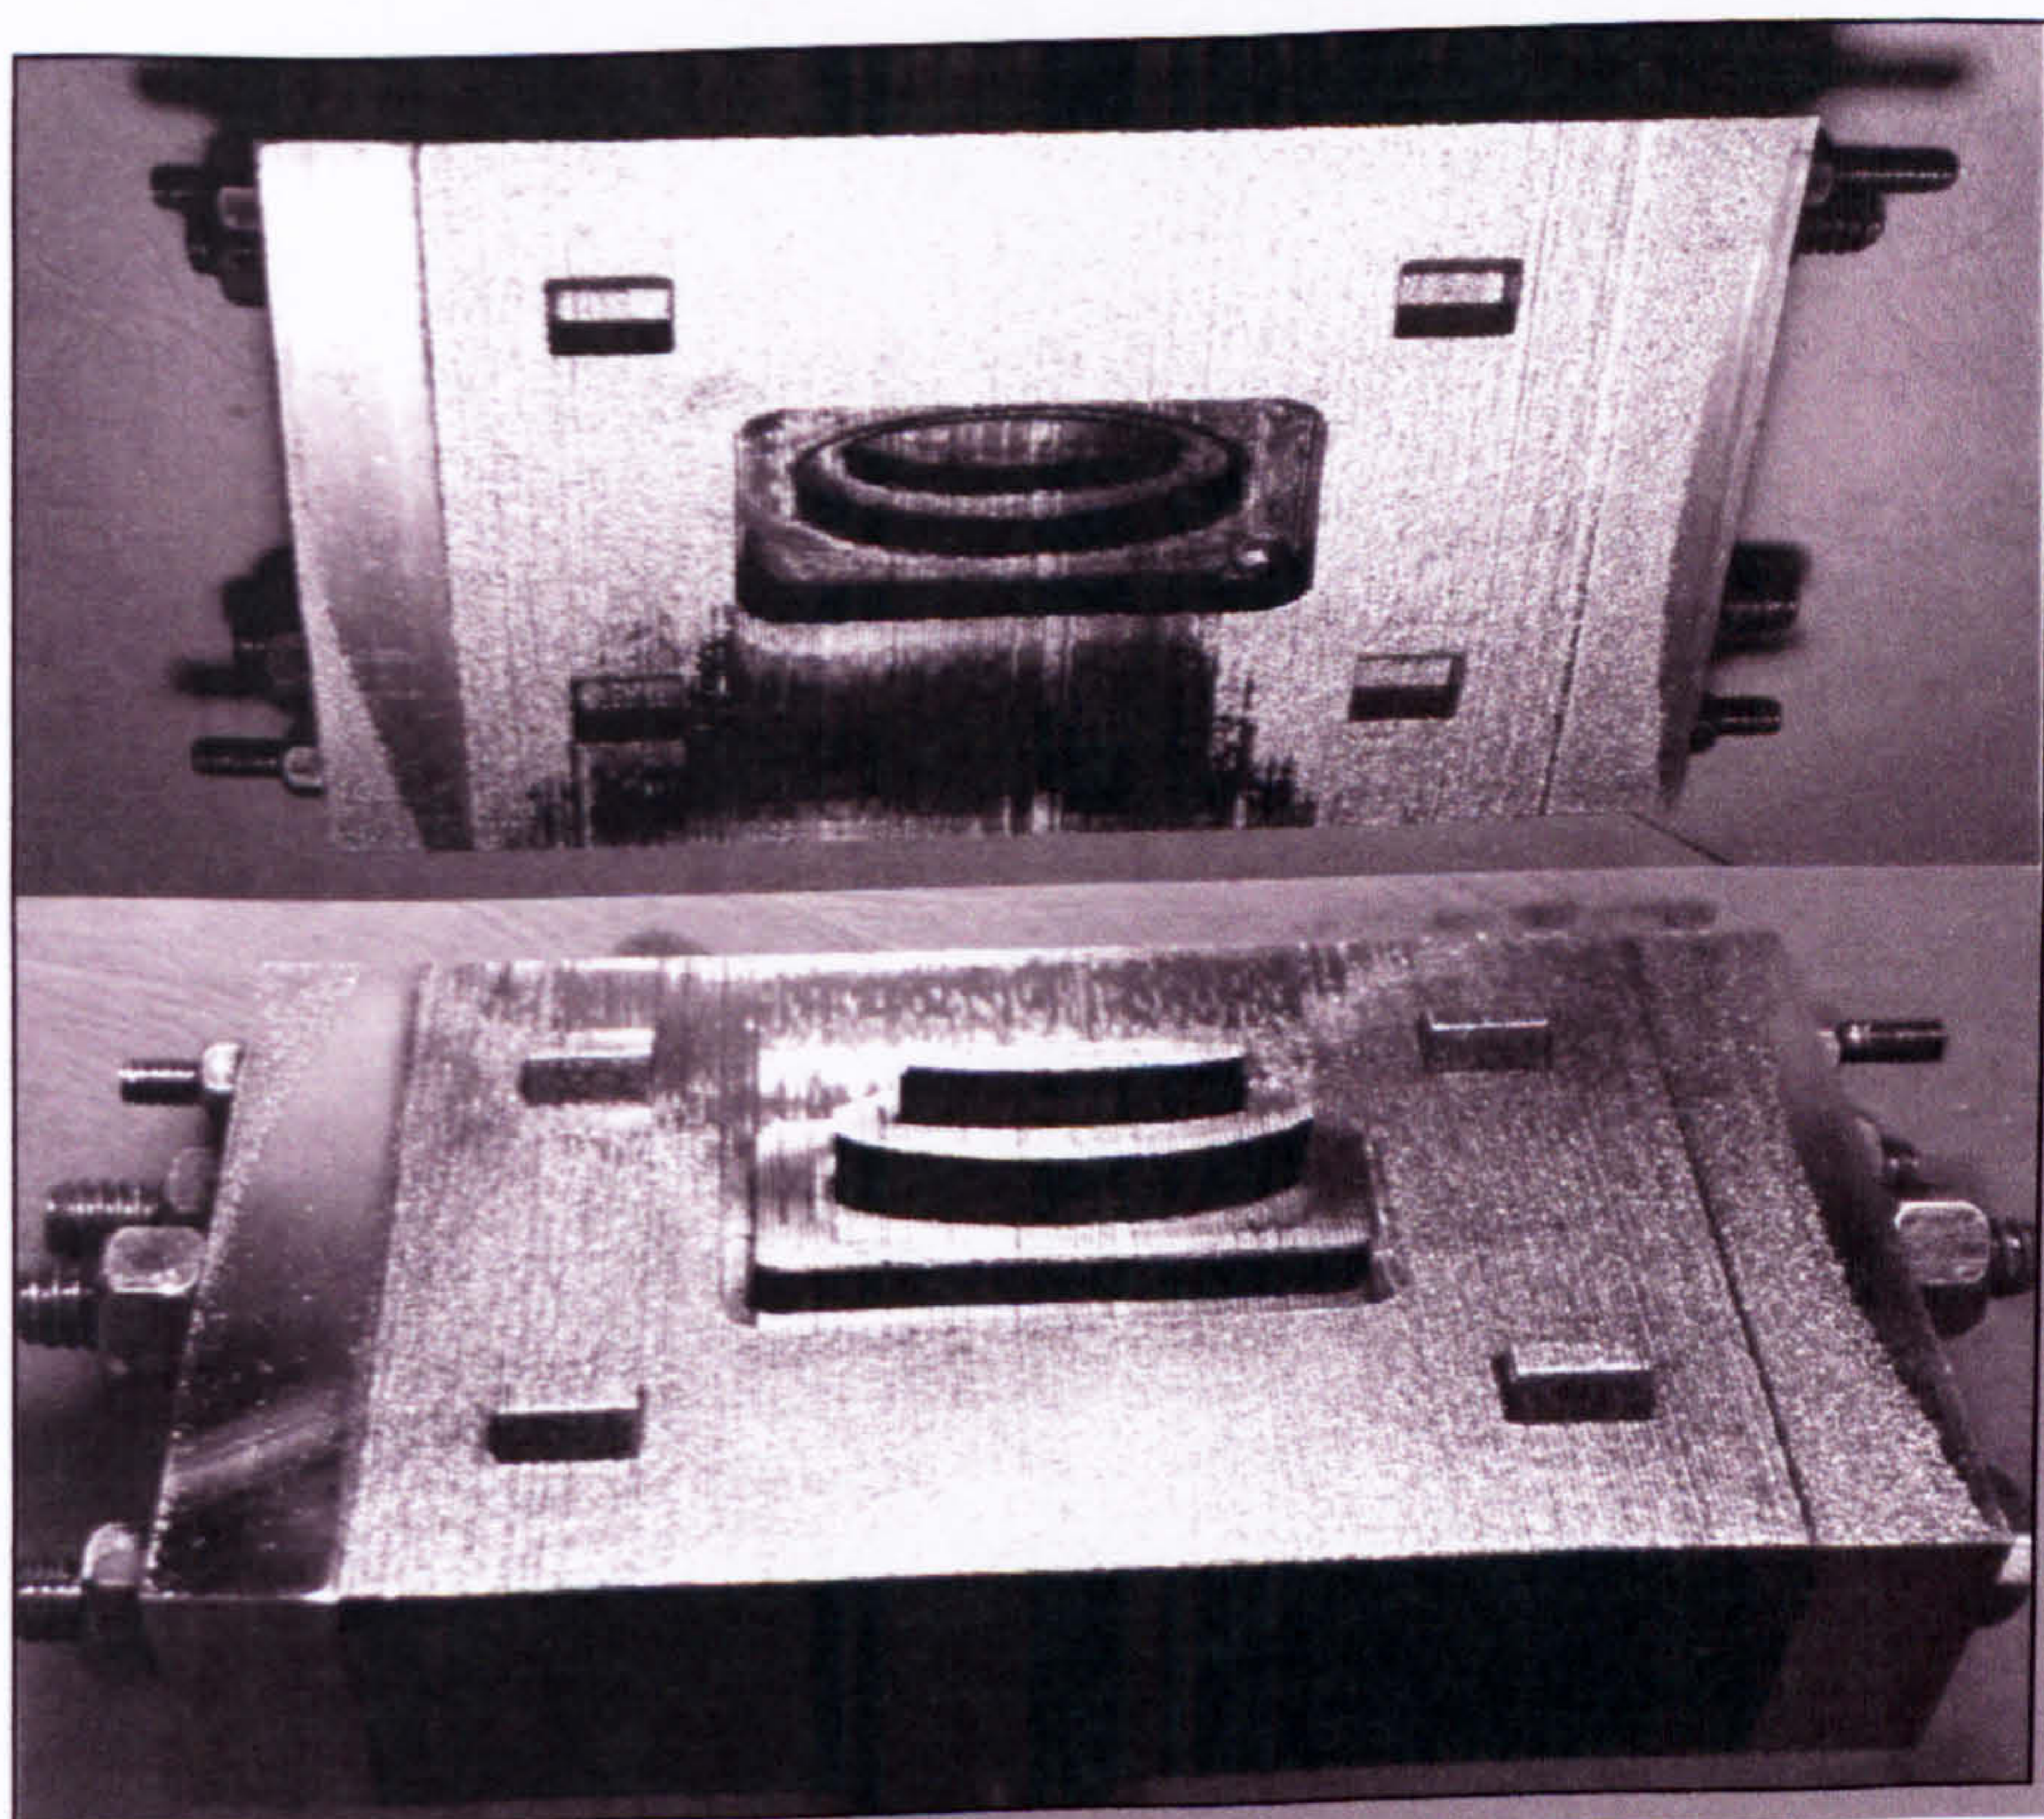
The two halves of the tool showing the 'sparked' parting line.
